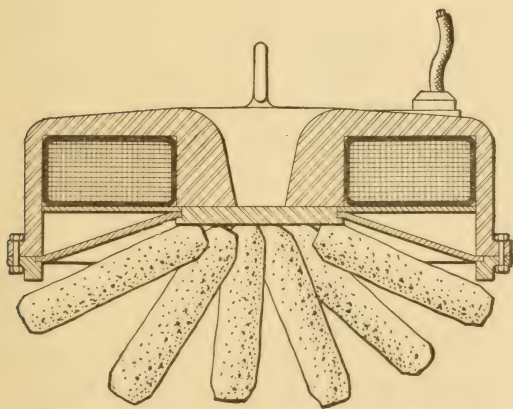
“WILTON KRAMER” LIFTING MAGNET LIFTING PIG IRON.
